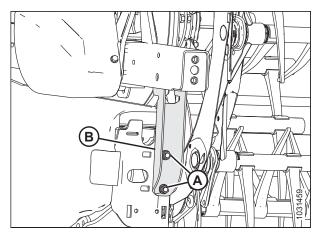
Outboard Reel Arm Supports – D1XL Header Shown
